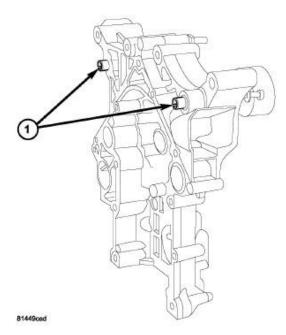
FRONT COVER SLIDE BUSHINGS Courtesy of CHRYSLER LLC
